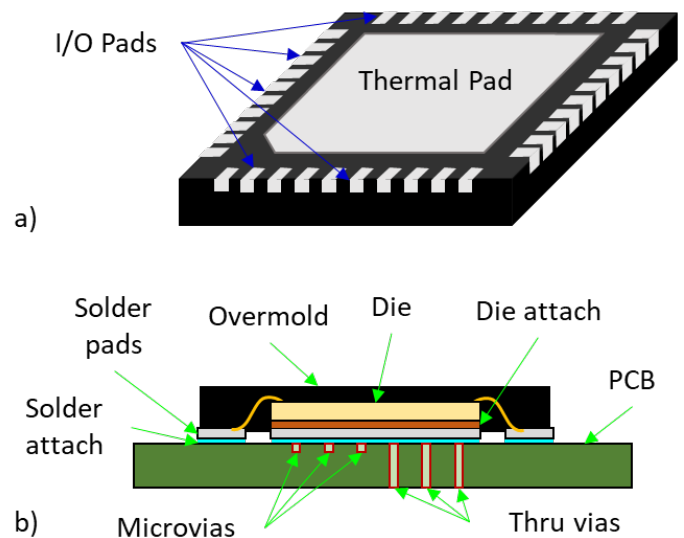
QFN package a) view from the bottom of component, b) cross-section of component assembled to printed circuit board [7]
